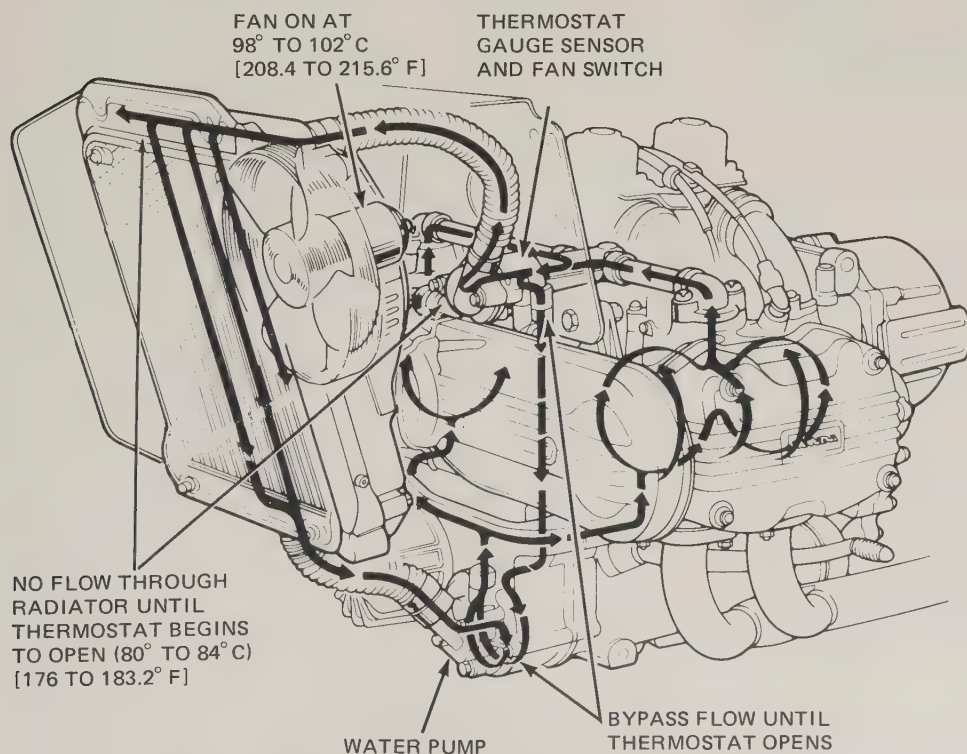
A liquid-cooled four-cylinder motorcycle engine. The arrows show the flow of coolant through the cooling system. (Honda Motor Company, Ltd.)
